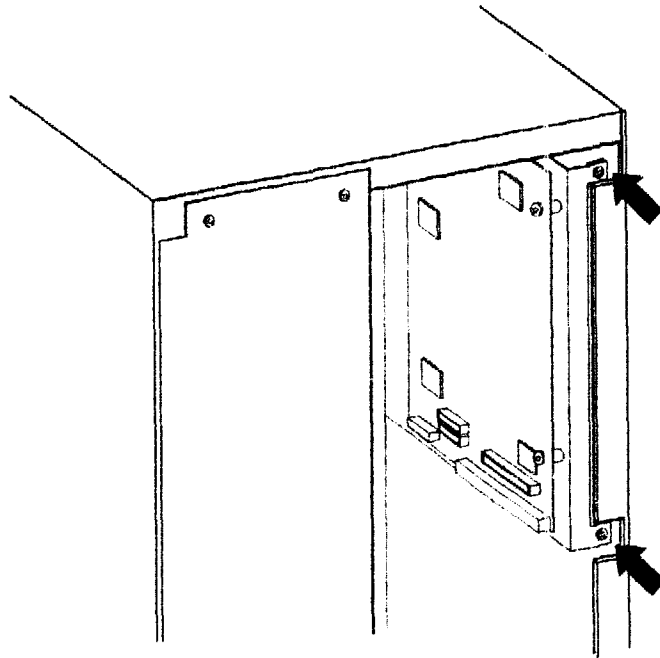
Removing the MO Drive Controller PCA Mounting Plate
